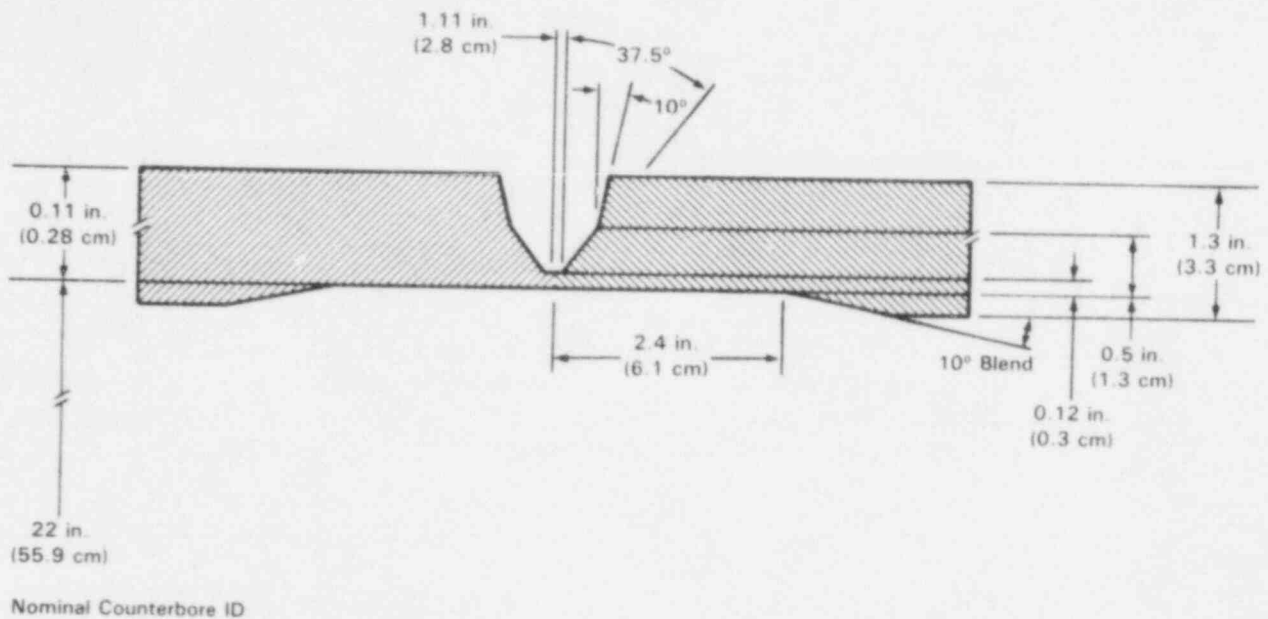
Groove Geometry of 24-in.-dia 304 SS Pipe Weld
